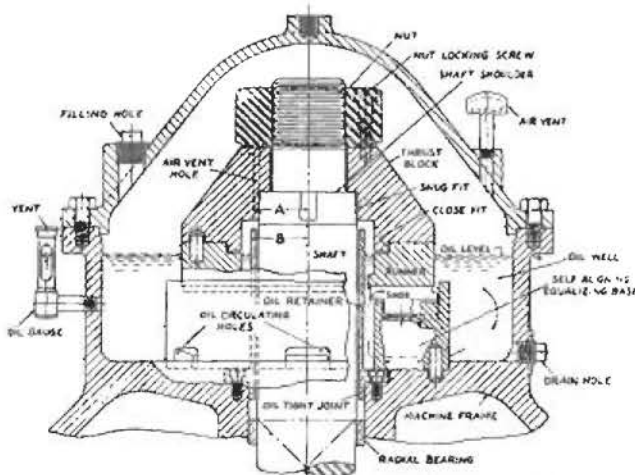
Simple mounting for vertical thrust bearing, Style LV or KV.
